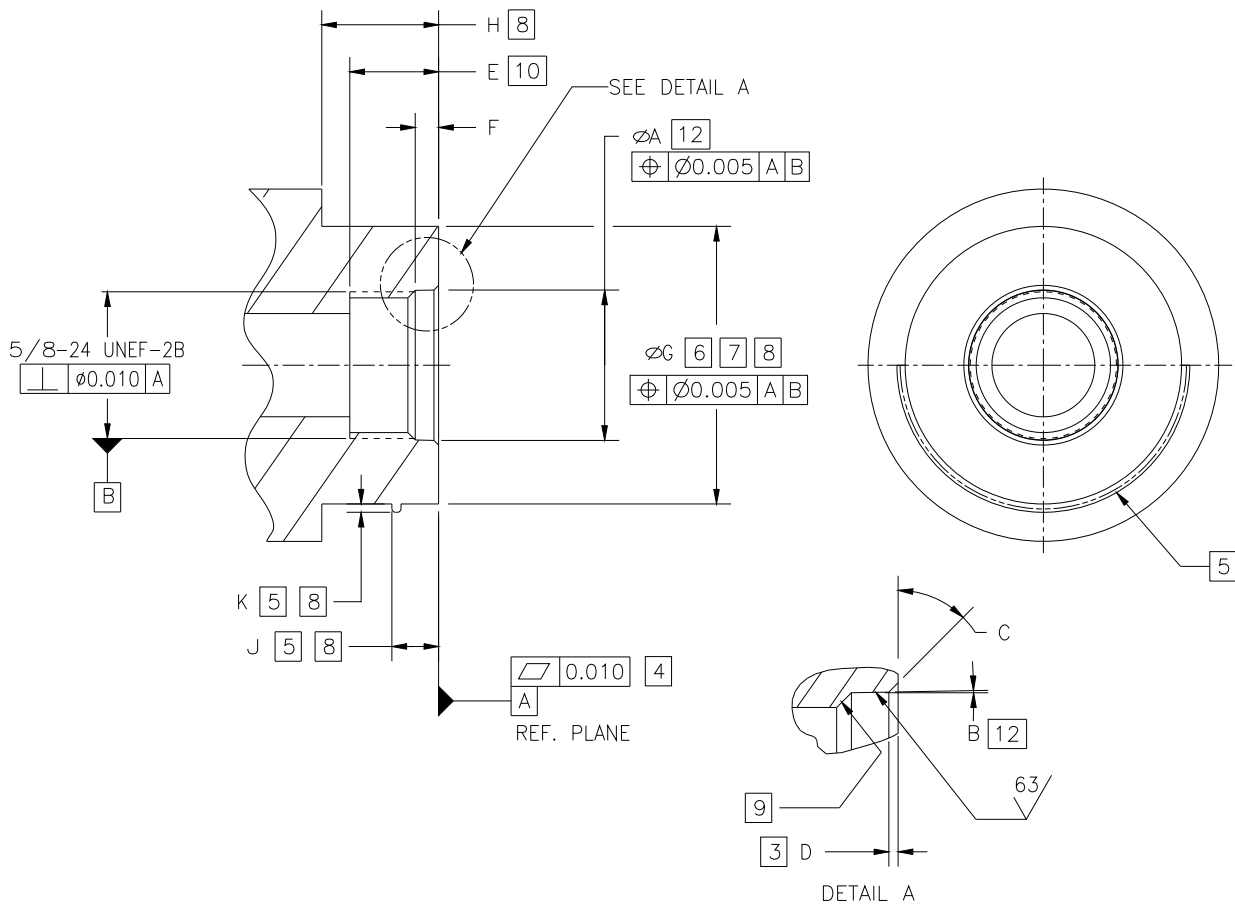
Physical Dimensions for 5/8-24 RF & AC Equipment Port, Female
